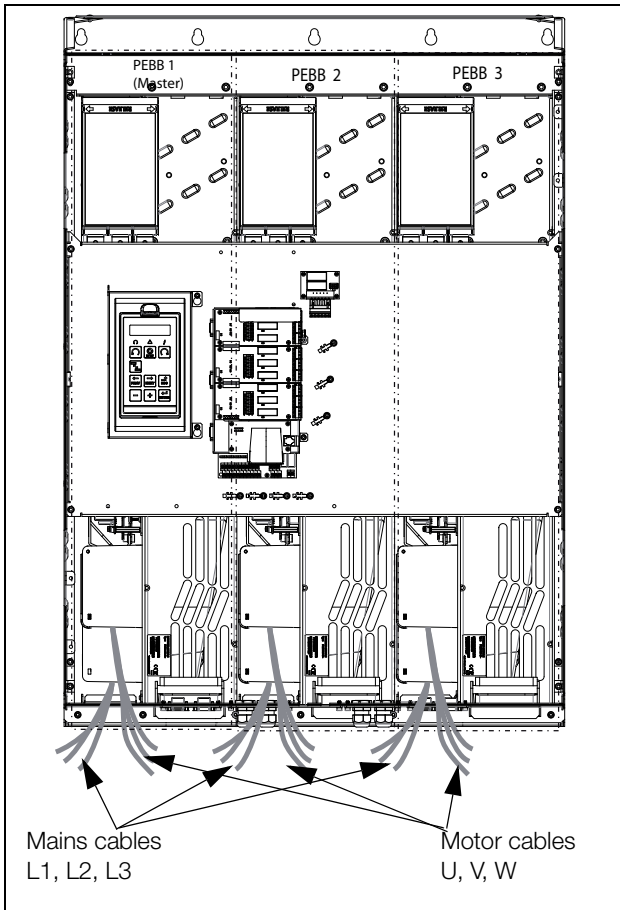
IP20 module sizes I1I69 with qty 3 x 3 Mains cables and qty 3 x 3 motor cables.
